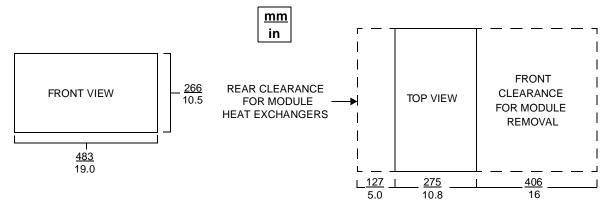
1x12 Fieldbus Module Mounting Structure Dimensions
